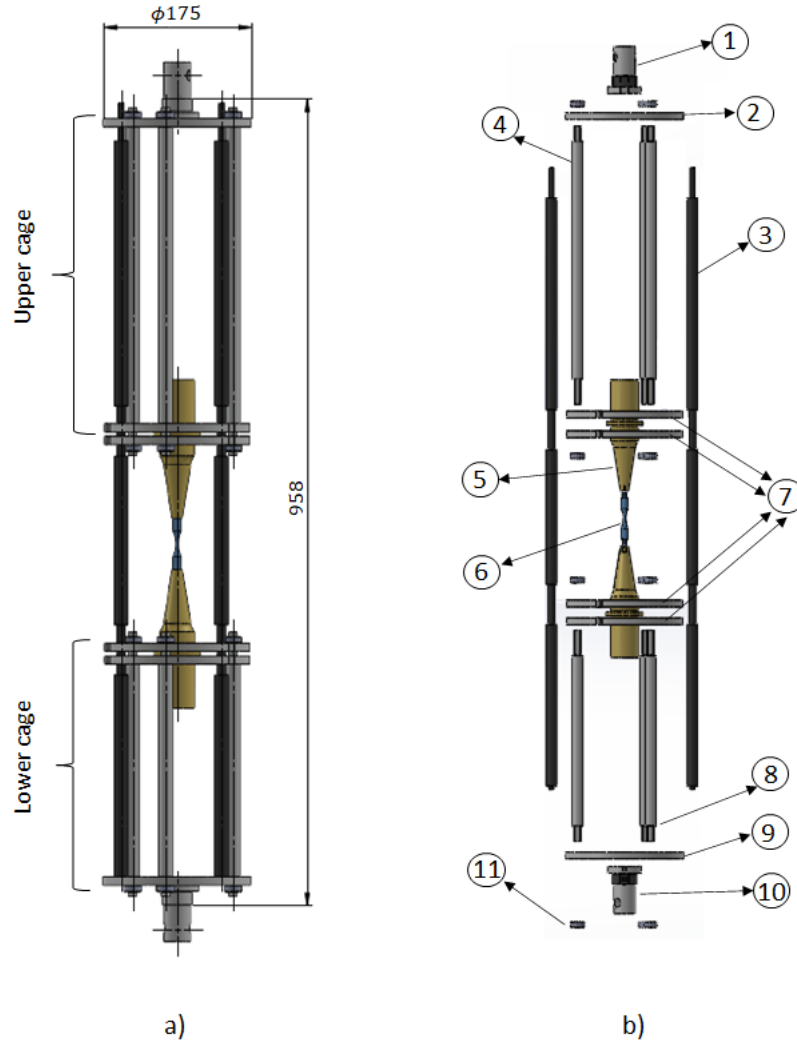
a) Principal dimensions of the developed structure and cage identification. Dimensions in mm. b) Exploded view of the structure from the front view. Legend: (1) link element, (2) upper disc, (3) guide rod, (4) upper rod, (5) horn, (6) specimen, (7) teared discs, (8) lower rod, (9) lower disc, (10) threads.
